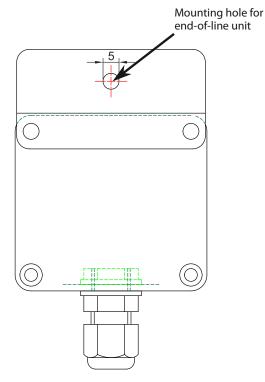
Fixing dimensions for mounting the Signaline HD+ End-of-line Unit
